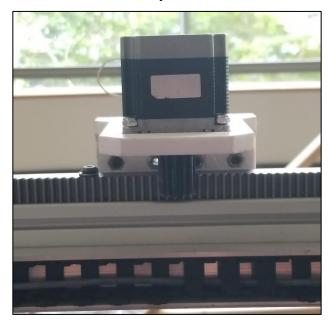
Mounted motor housing on rack and cable holder; both are mounted to a 20' 80/20 extrusion.
